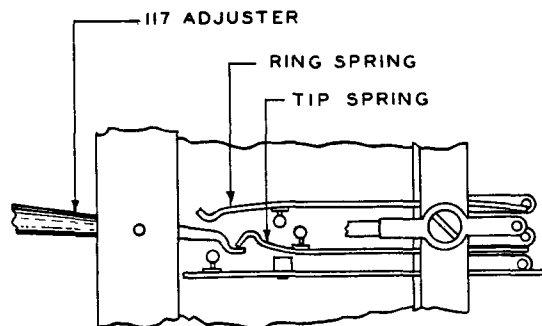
Method of Adjusting Tip Spring in a 229-Type Jack
